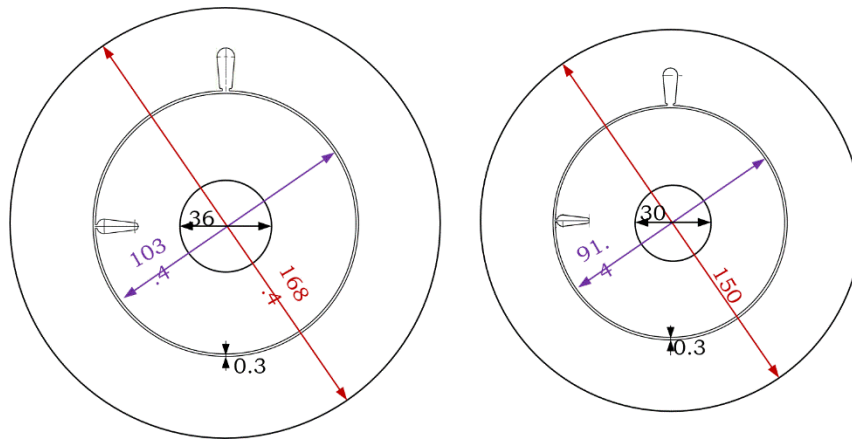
Cross-section view of the 3 kW motor (left) and of the 1.5 kW motor (right)
